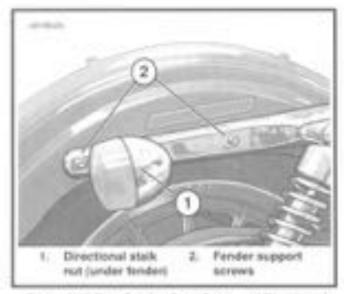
Rear Fender, Strut Cover and Directional Lamp Assembly
